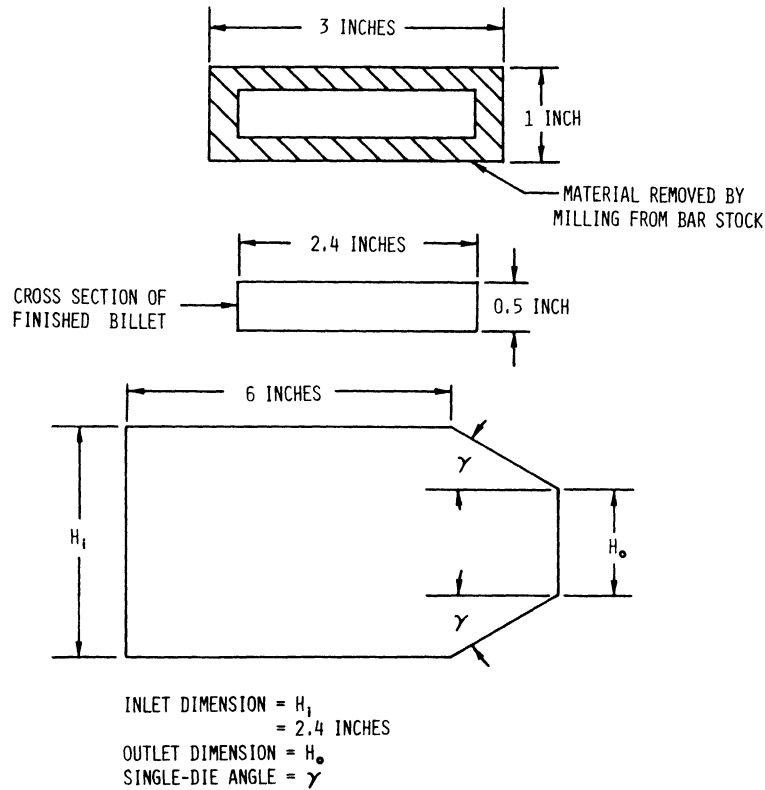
Extrusion Billet. Material: 6061-0 aluminum
